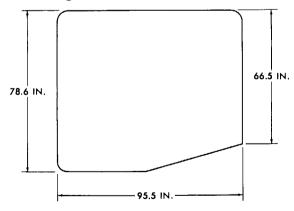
MAIN CARGO DOOR DIMENSIONS, C-46
